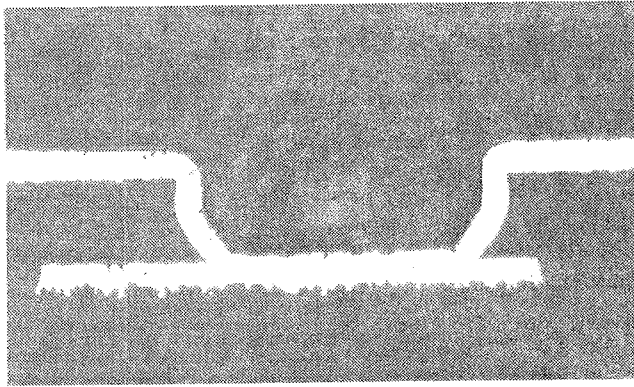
Cross section through a plasma etched blind via after hole forming and Cu plating.
